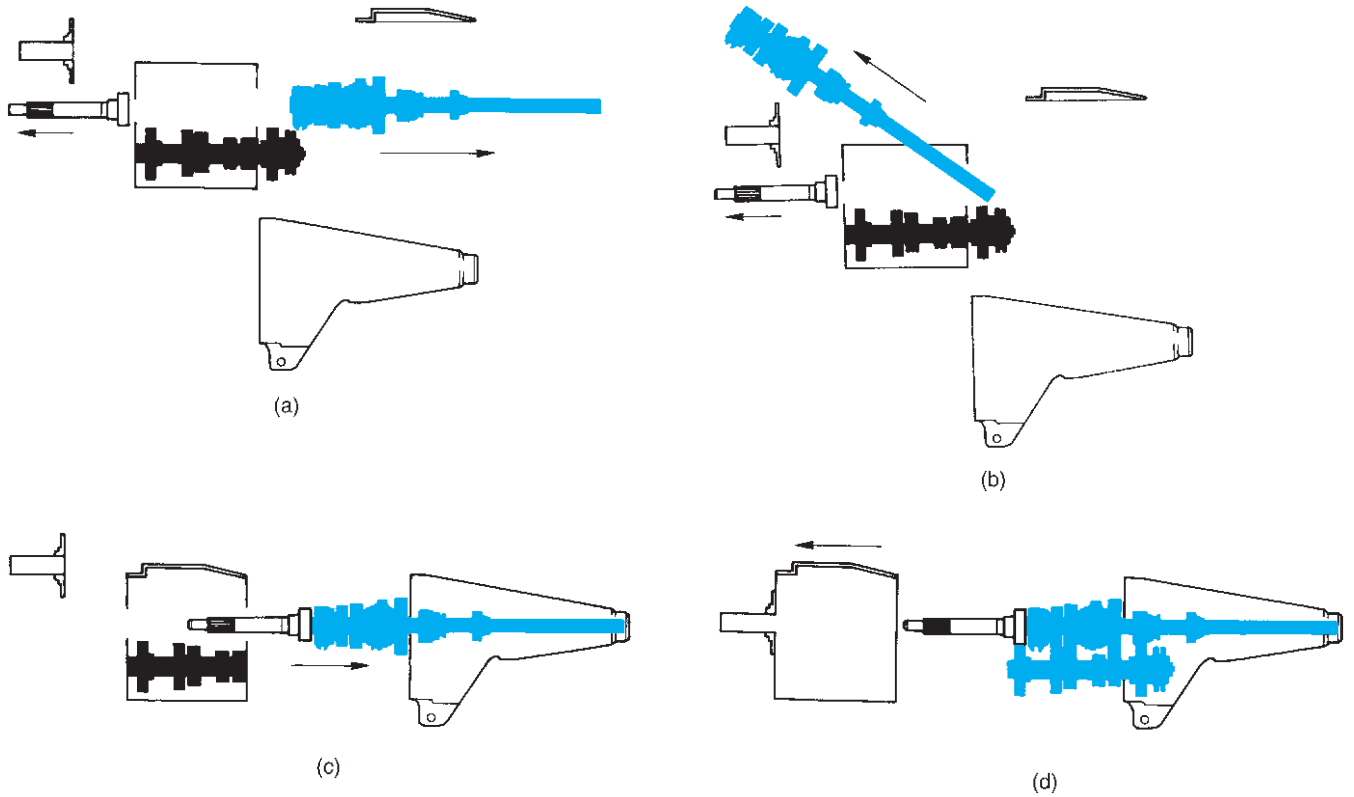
The disassembly procedure varies depending on the transmission. The clutch shaft and mainshaft may be removed from each end (a), the mainshaft may be removed through the top (b), the clutch shaft and mainshaft may be removed from the rear (c), or all the shafts may be removed from the rear (d).
